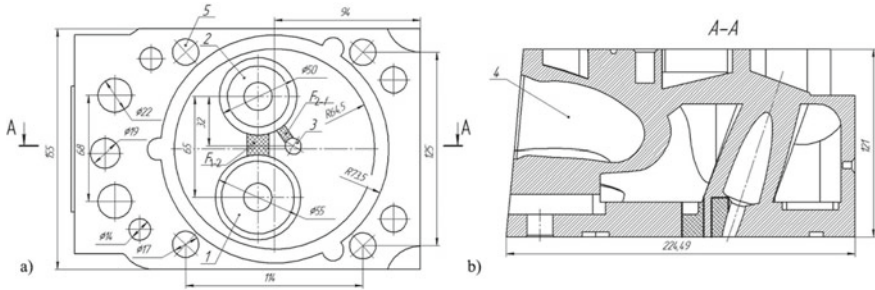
Cylinder Head of diesel 8CHN12/13: a view from the firing surface of the CH: 1—inlet valve; 2—exhaust valve; 3—hole for installing the nozzle, 4—inlet channel; 5—holes for mounting pins CZ; F_{1-2} —inter-valve jumper; F_{2-f} —jumper between the exhaust valve and the nozzle cup; b cross section along the line A–A
